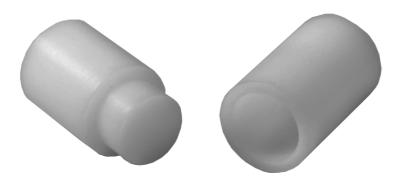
01-307M and 01-307F Cable Soldering Fixtures
